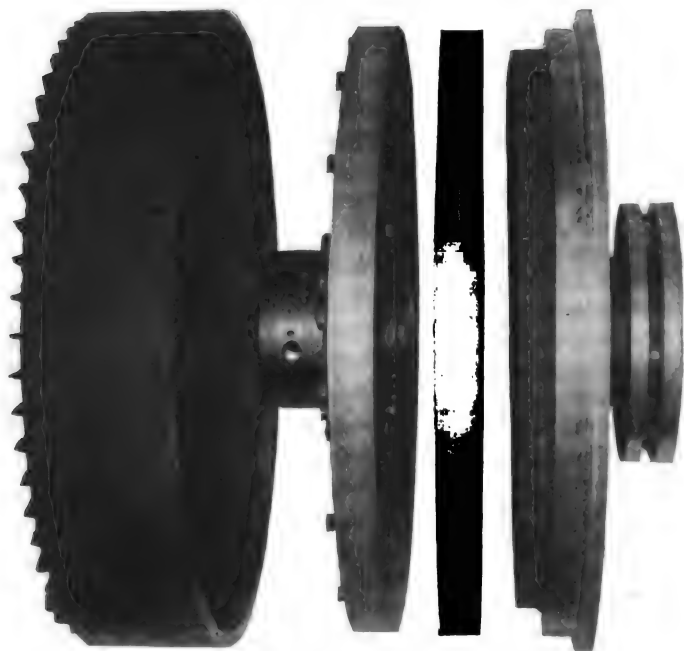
PARTS BEFORE BEING ASSEMBLED.
